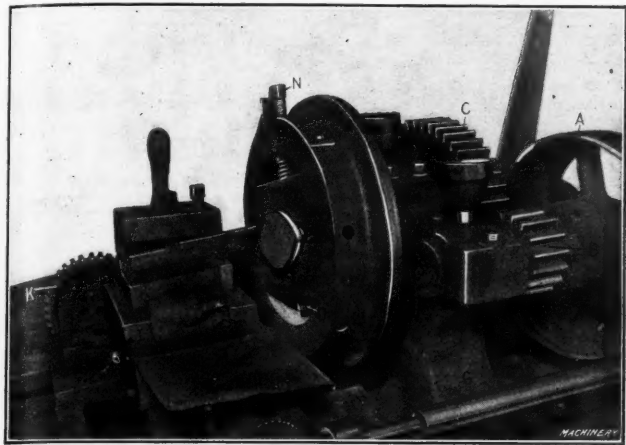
View showing Construction of Old Chuck and Tool-slide
